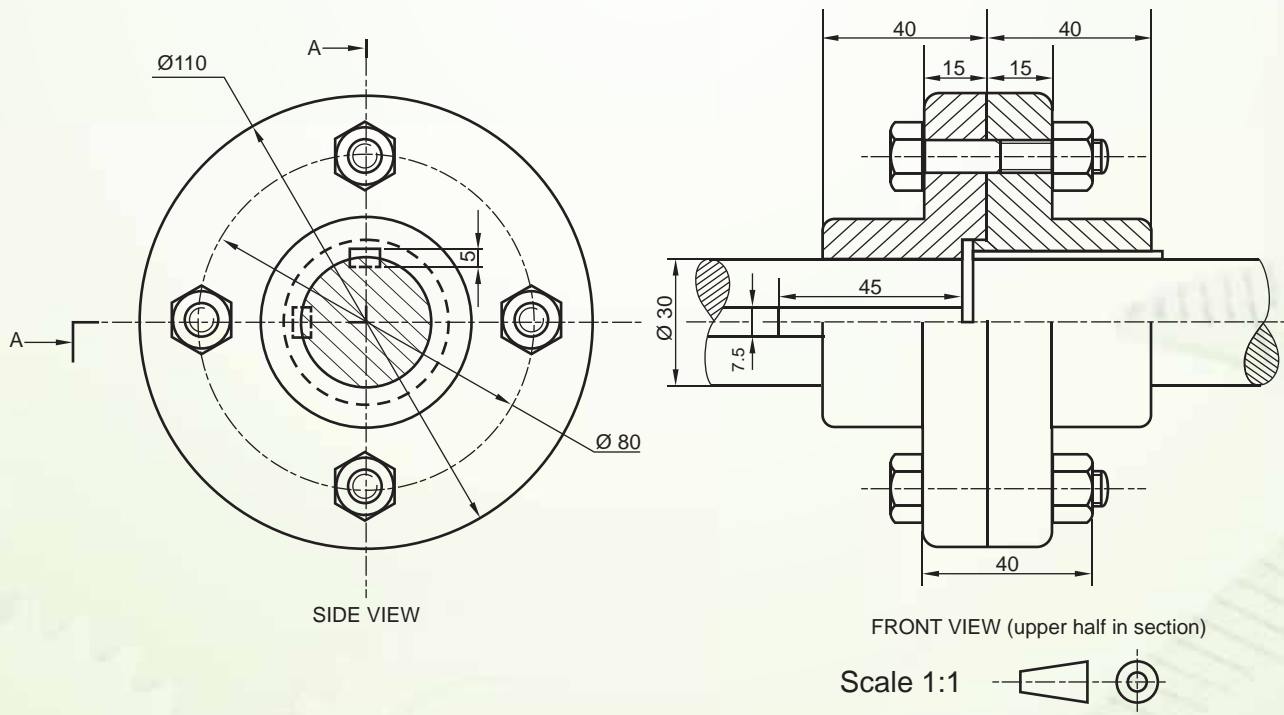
DETAILS OF AN UNPROTECTED FLANGE COUPLING.
